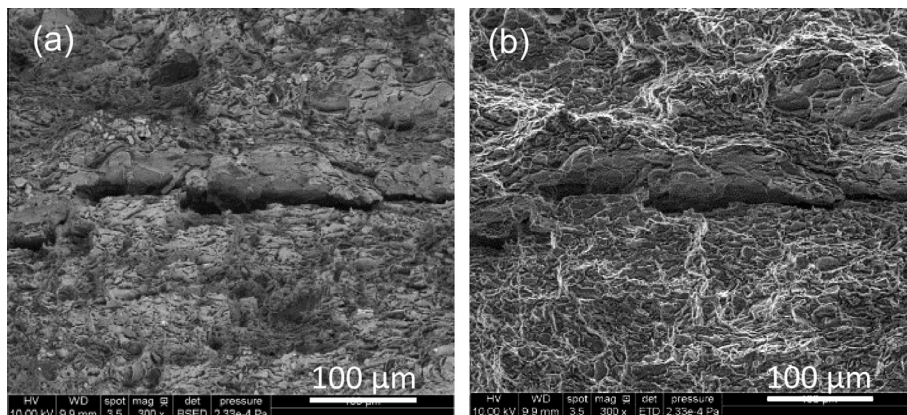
SEM images of fracture surface of Al6061-1.0 wt.% graphene composite milled for 10 min showing a large crack that appeared on the surface: (a) BSE detector, and (b) ETD detector.
